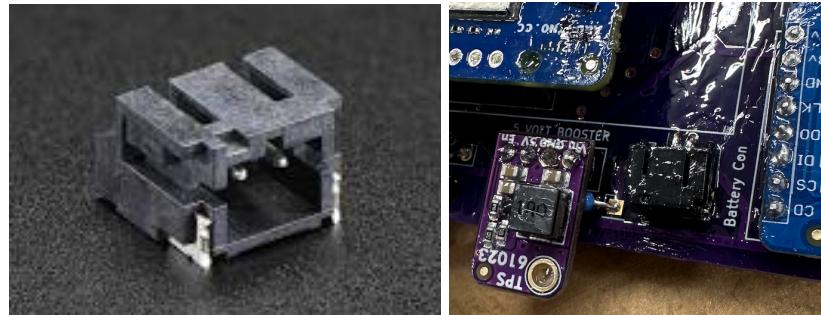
JST 2-pin battery connector (Left). Battery connector installed on PCB (Right)
